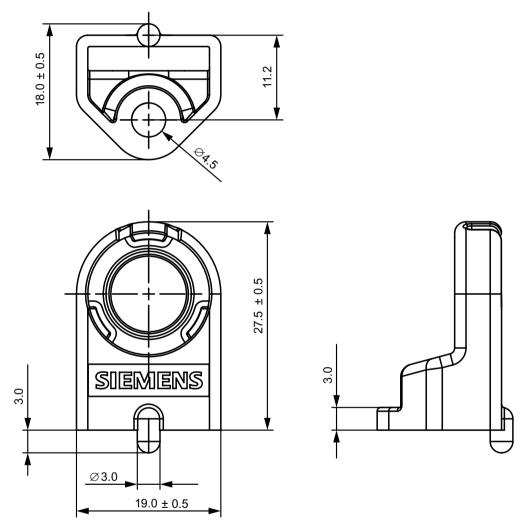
Dimension drawing corner mounting bracket 6GT2690-0AN00
